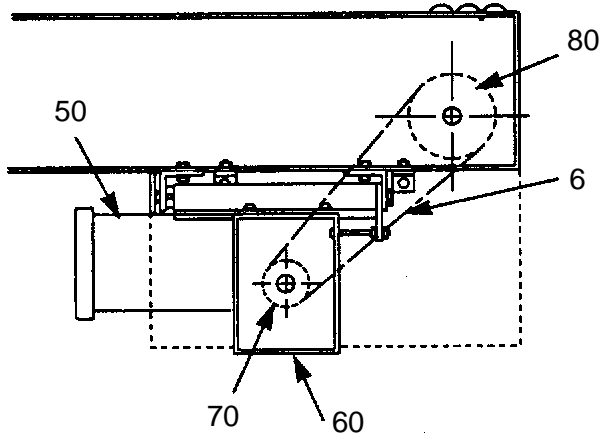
Power Unit - Underhung Mount (UH) RH Assembly Shown
